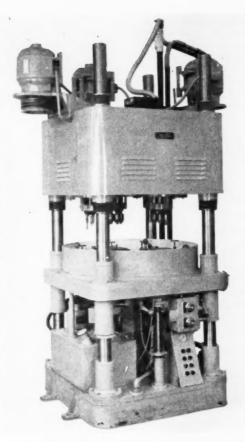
An 18-Spindle automatic forming, boring and drilling machine for the production of water softener valves. The machine is hydraulically operated to actuate rapid traverse, feed and quick return cycle of the work table; it is so designed that it can be readily adapted to other jobs besides the one for which it was designed. The machine is steel fabricated because of the saving in original expense as well as the saving in time.
